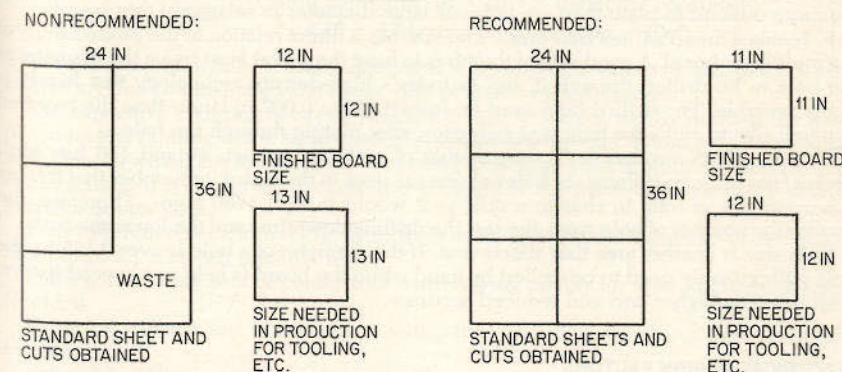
Adjusting finished board size to the standard sizes of clad sheet material will reduce the waste for which the purchaser pays.
